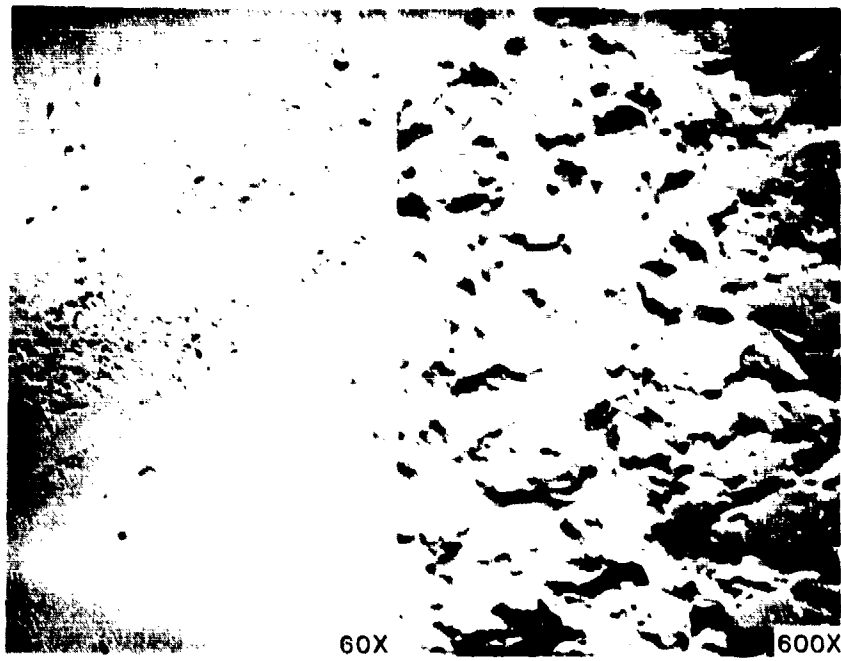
Fatigue Pitting (Right) on Roller End (Left) Caused by High Stress Contact With Inner Race Following Extensive Rubbing (Polishing) Wear (Left-Lower Right)
